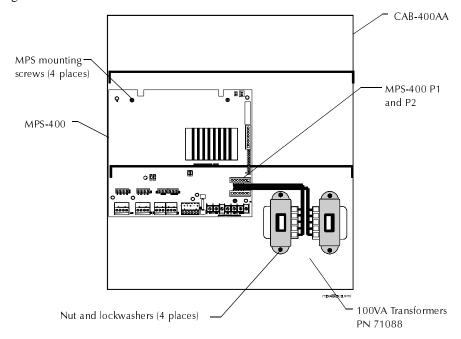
Mounting an MPS-400PCA into a CAB-400AA
